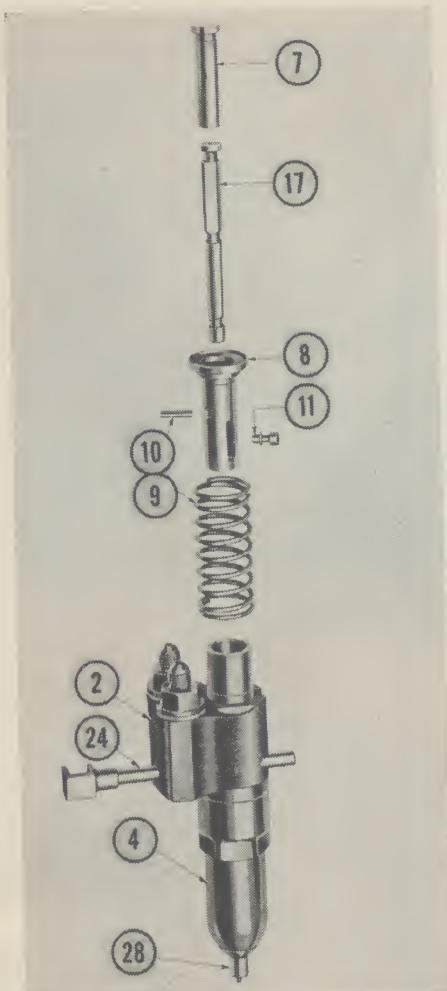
A—Non high valve type injector plunger and follower details. Follower (7) and guide (8) are integral on high valve type injectors.
